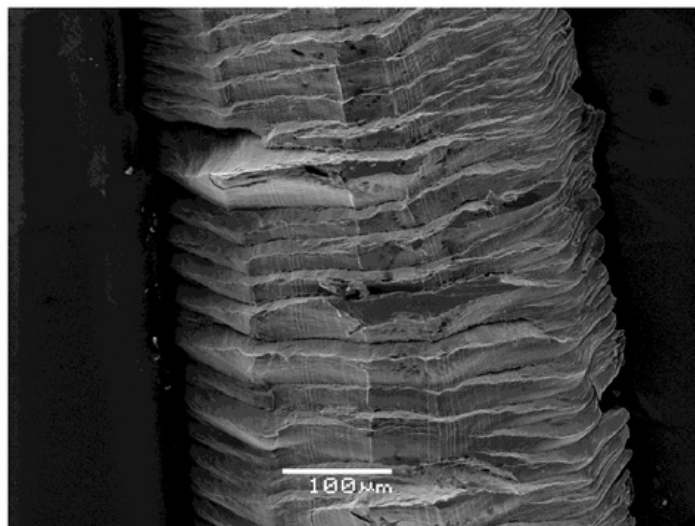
displays the swarf from 1<sup>st</sup> machining pass of machining SLM 3D Printed Ti-64 using a TNNG coated carbide using Average machining parameters. Large serration can be seen on the right hand side of the swarf, lessening in size on the left. The ridge spacing is very tight towards the bottom and gradually gets larger towards the top.
